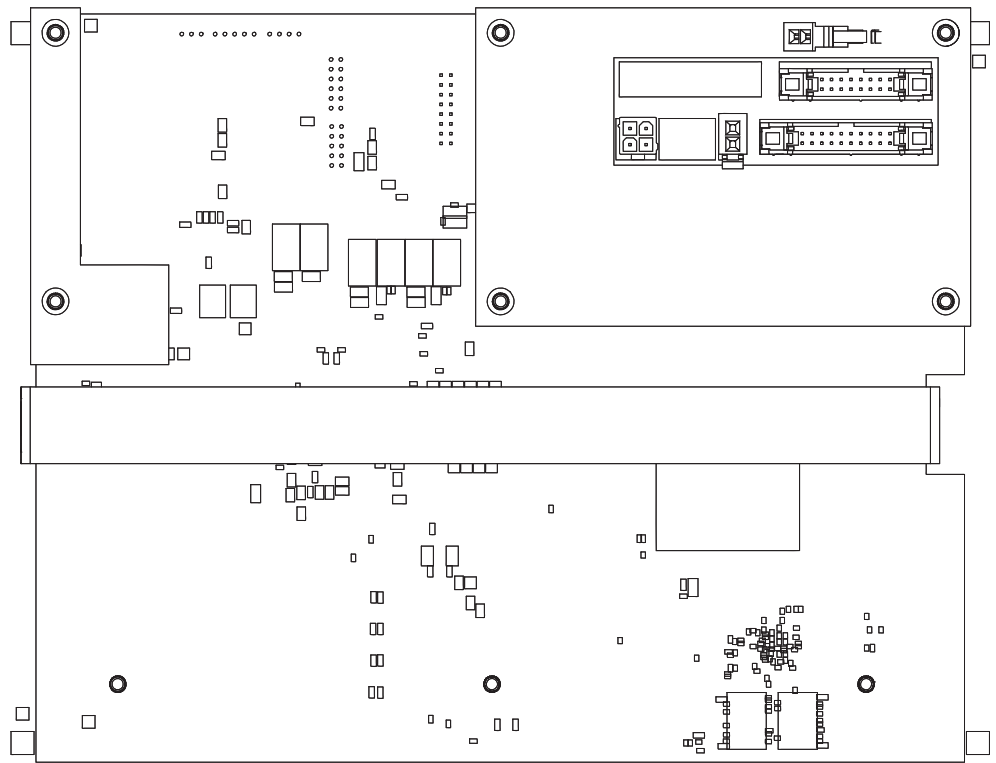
Control System Board (CSB 5/PIB) - Rear View
